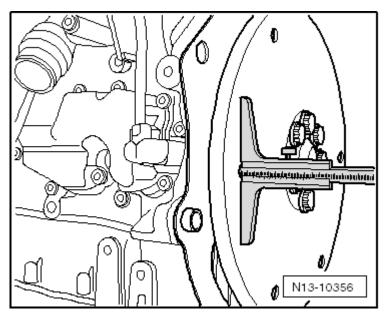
Identifying Dimension Between Drive Plate And Cylinder Block Courtesy of AUDI OF AMERICA, LLC
